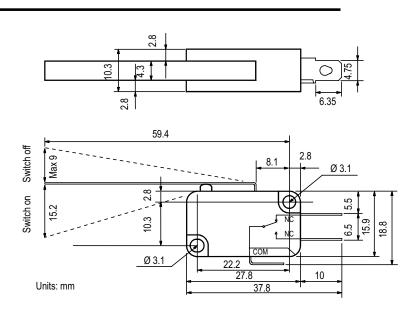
Dimensions of Interlock Switch (3101-0302)
